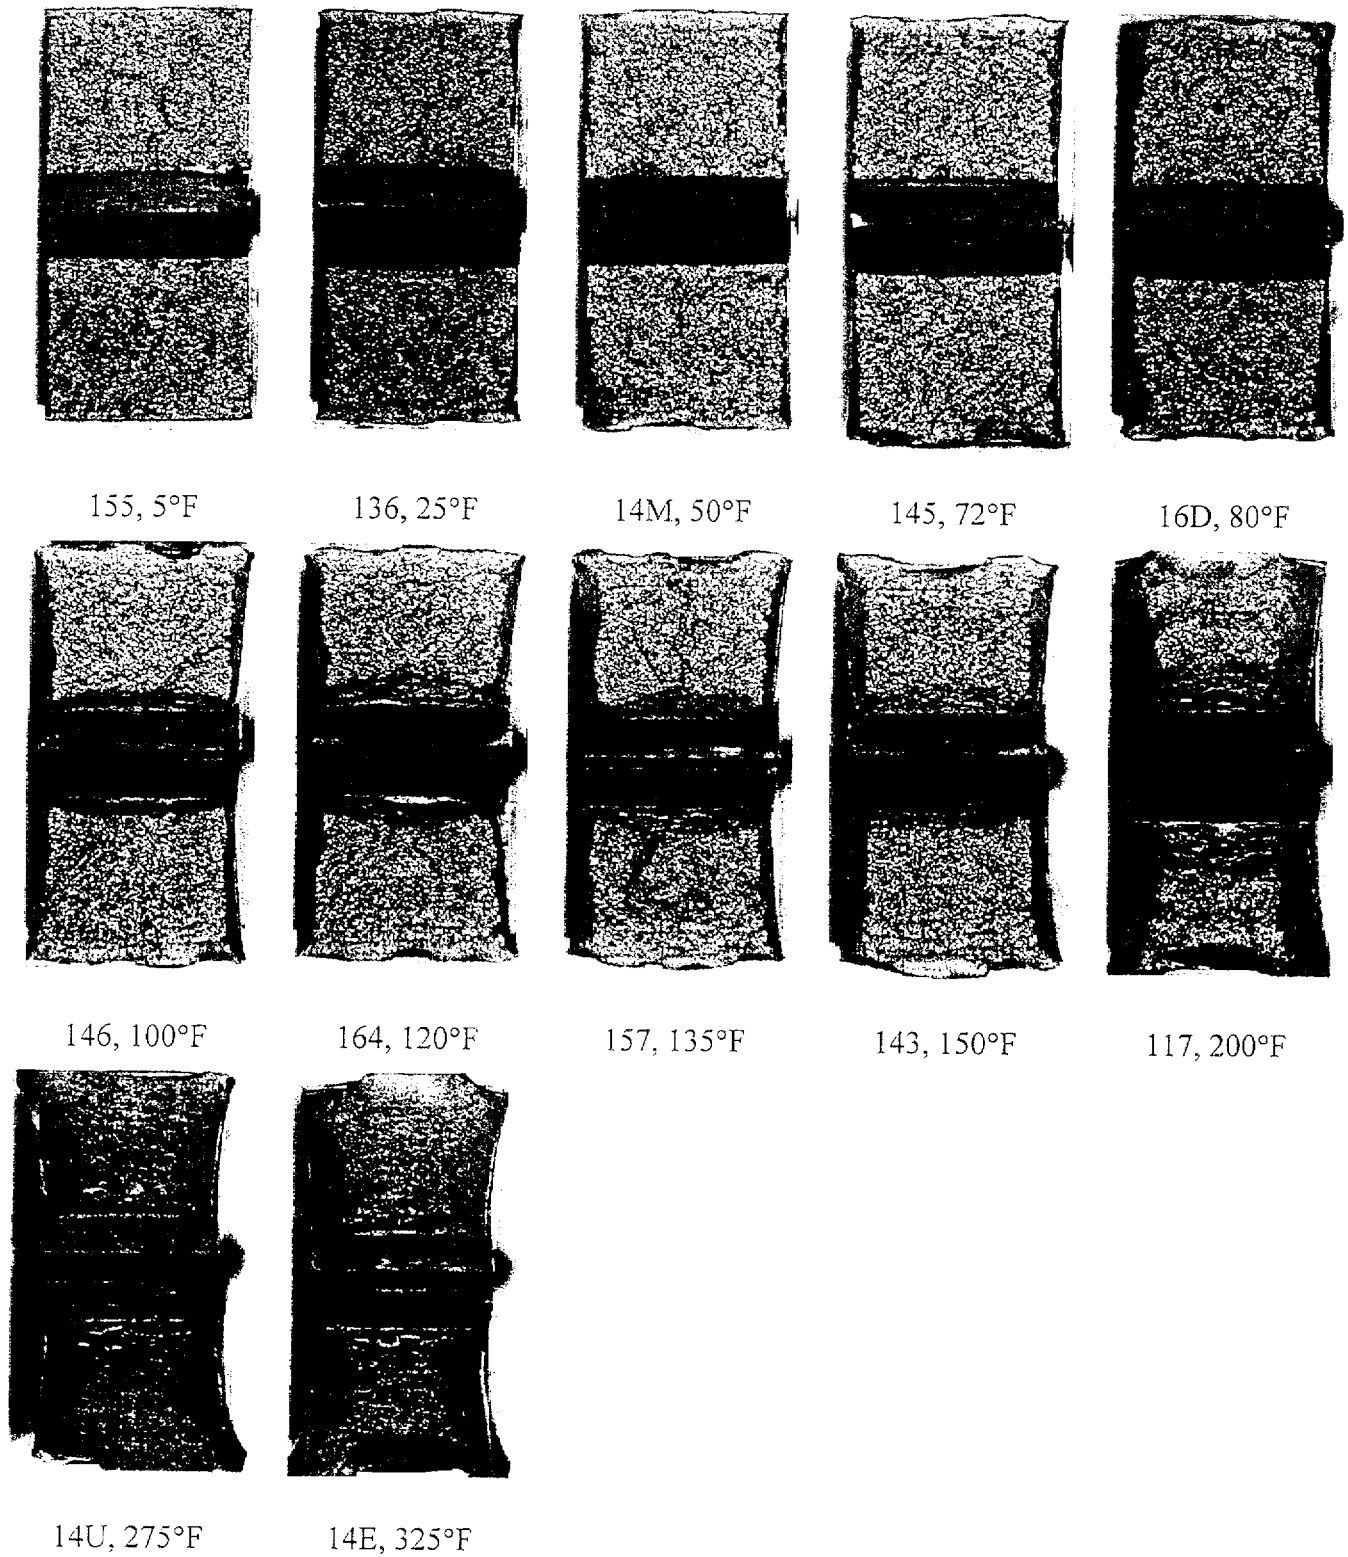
Charpy Impact Specimen Fracture Surfaces for St. Lucie Unit 1 Reactor Vessel Lower Shell Plate C-8-2 (Longitudinal Orientation)
